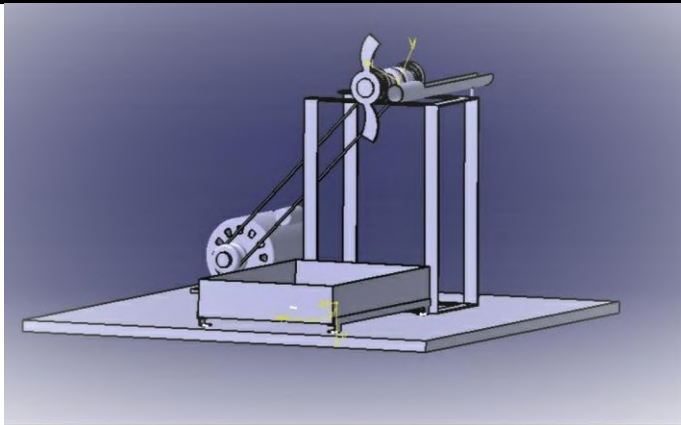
AutoCAD of little gourd cutter (Isometric view)
